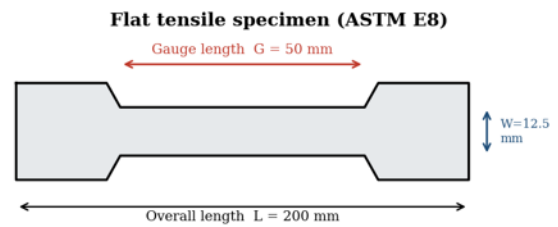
Geometry of the flat tensile specimen (ASTM E8)
